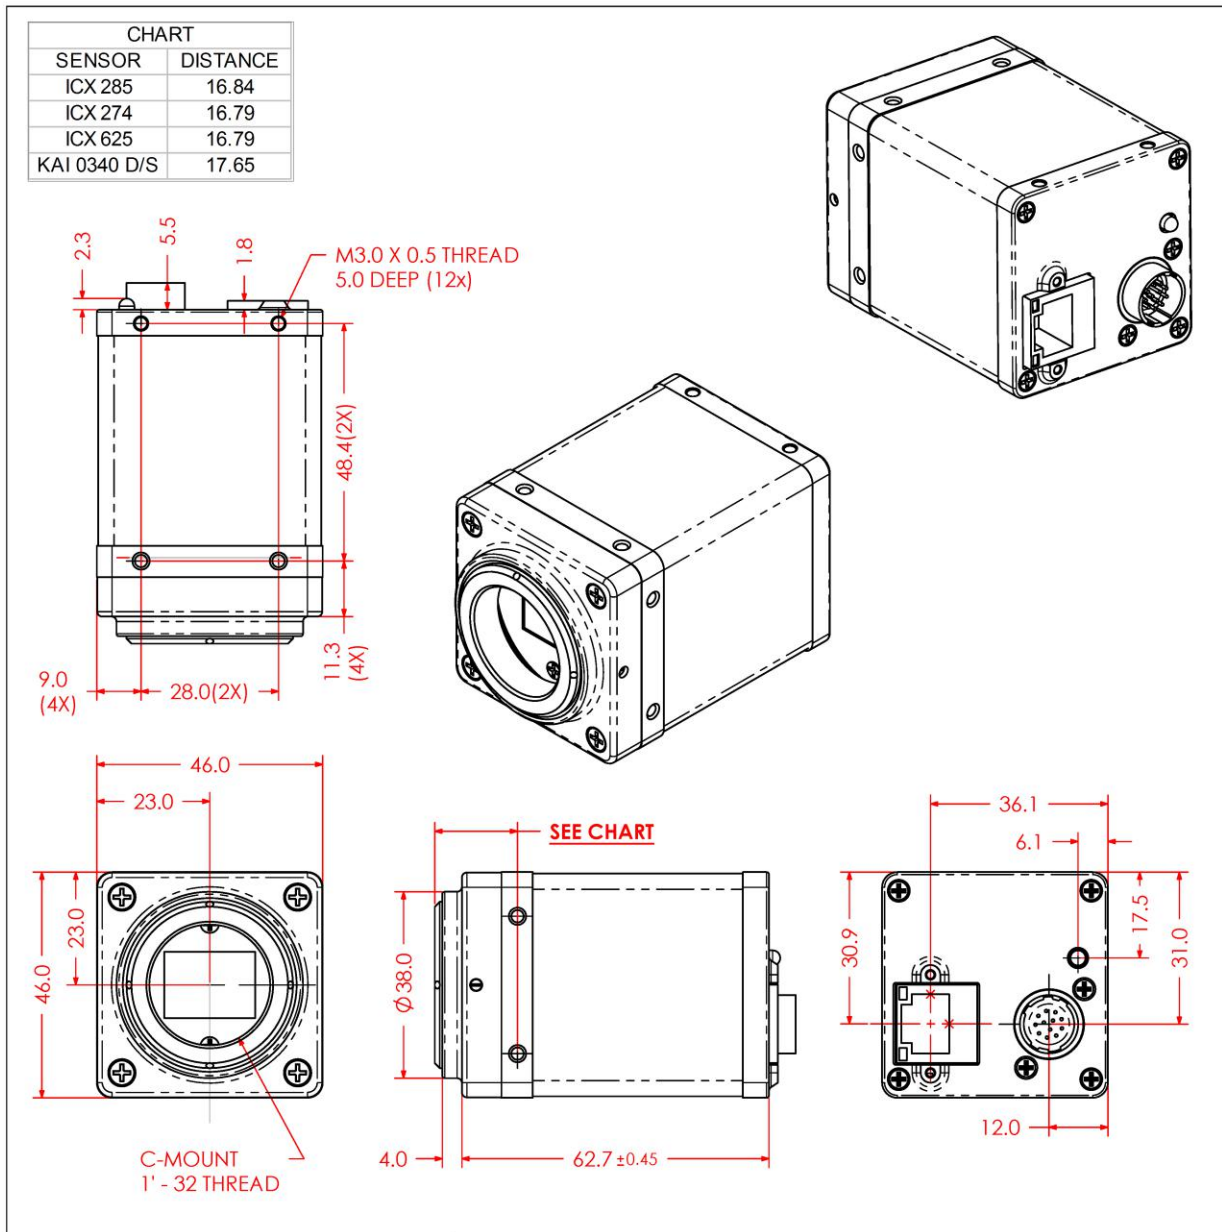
C-mount GigE vision output – dimensional drawings for IGV-B0610, IGV-B0620, IGV-B1410, IGV-B1610 and IGV-B2520.
